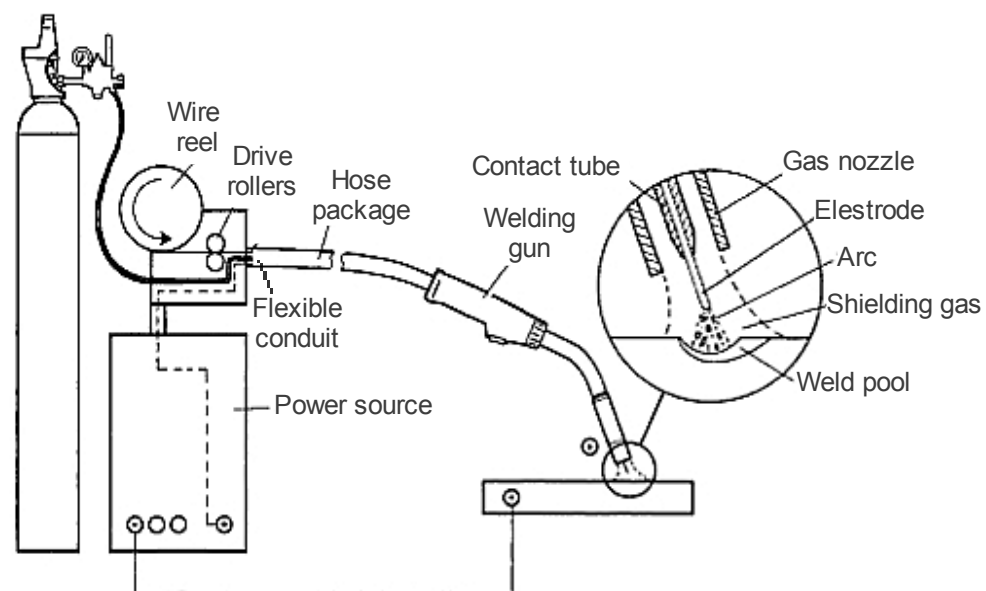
Schematic overview of an MIG/MAG welding unit: [15]
